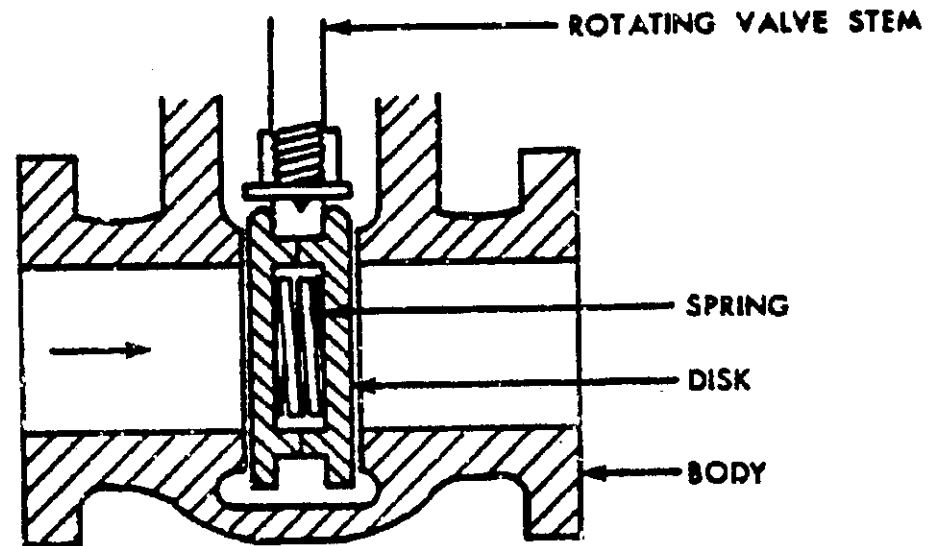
A Parallel Slide Gate Valve Body Assembly.
